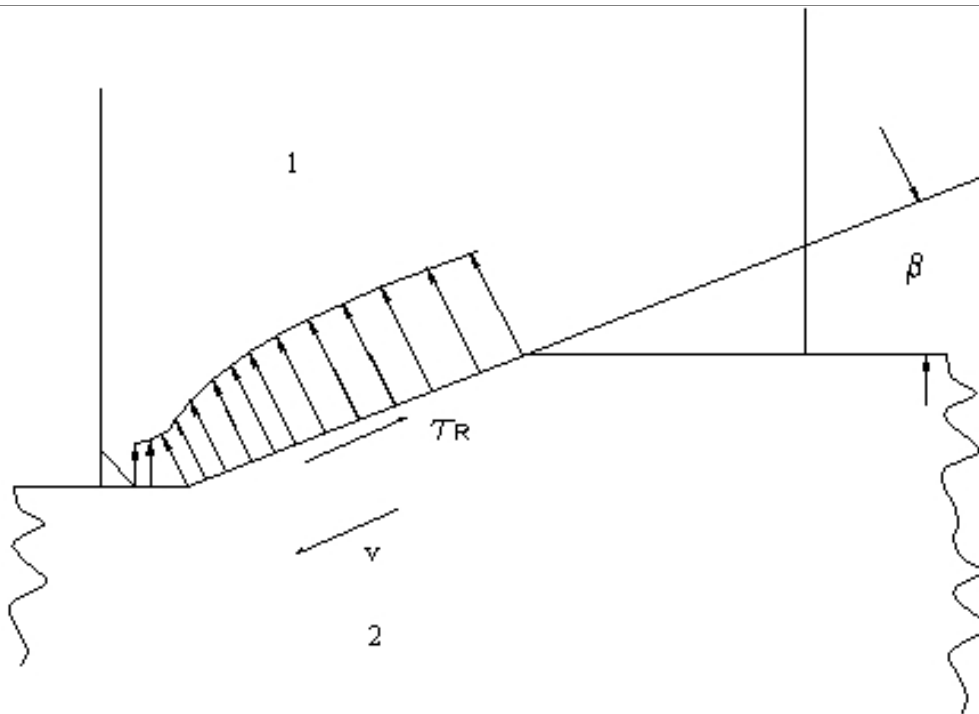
Die (1)-workpiece (2) interface – on the macro scale
